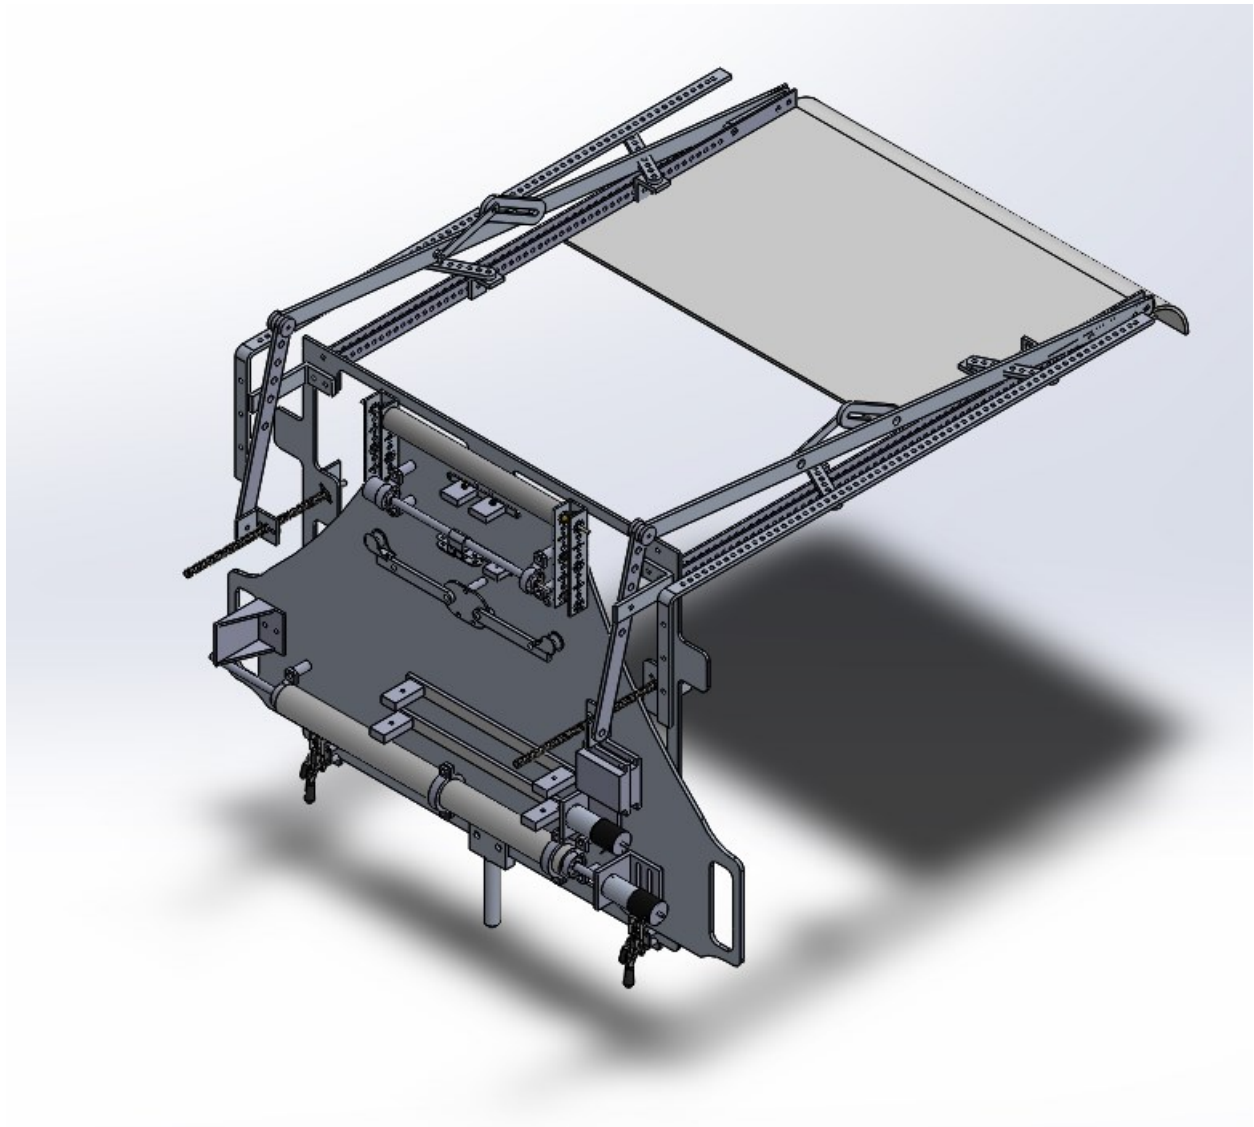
Front view of the winch assembly attached to the vent mount assembly.
